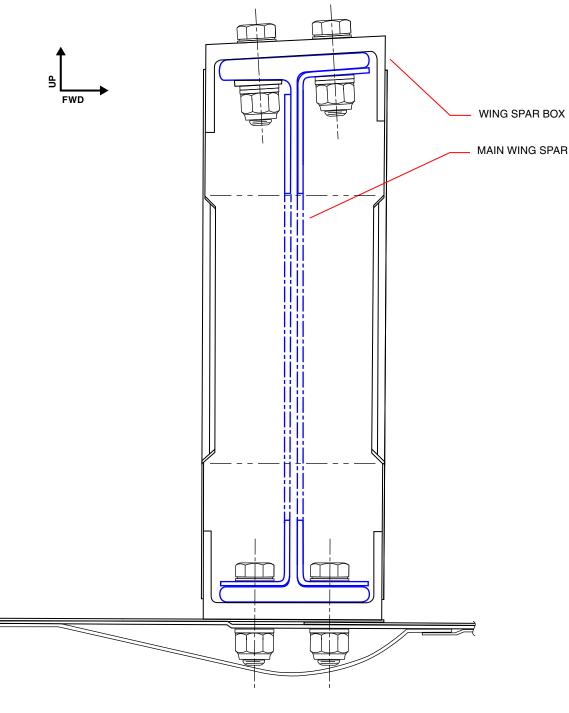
, Sheet 1 of 2 Typical Main Wing Spar Attach Bolts and Spar Cross Section (Right Wing Shown)
